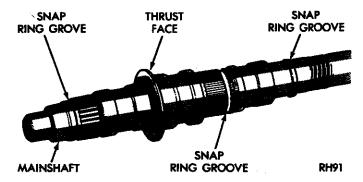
Mainshaft Snap Ring And Thrust Surfaces Bearings/Thrust Washers
